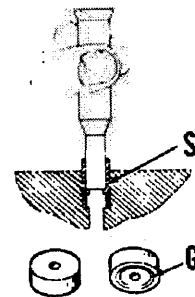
Use a 5/32 inch (3.9687 mm) flat punch to install new inlet needle seat. Install seat with grooved side (G) down.
